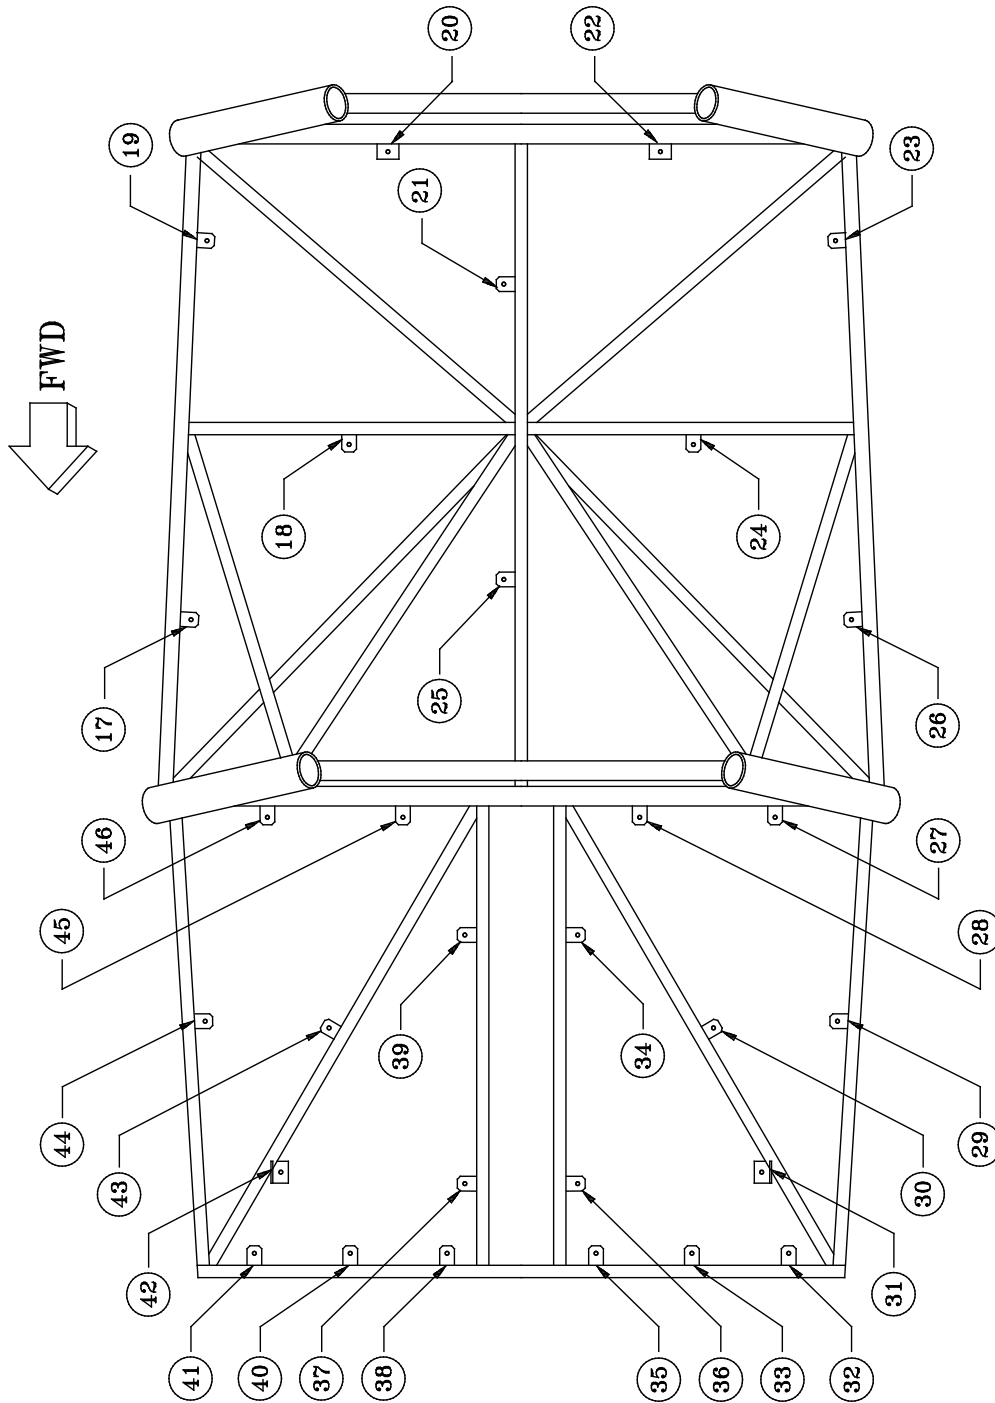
Drilling the Initial Attach Tab Hardpoint Holes
